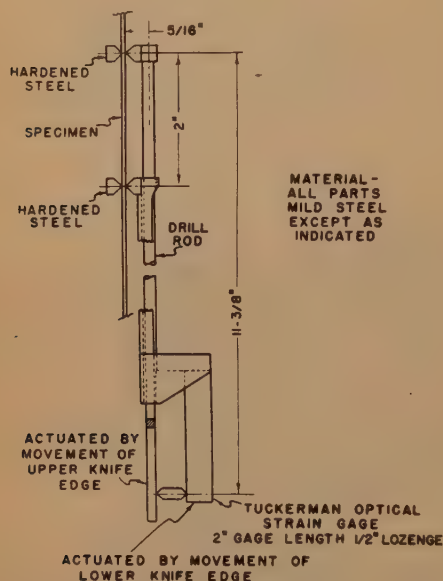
SCHEMATIC DRAWING OF EXTENSOMETER ASSEMBLY FOR USE AT ELEVATED TEMPERATURES.
